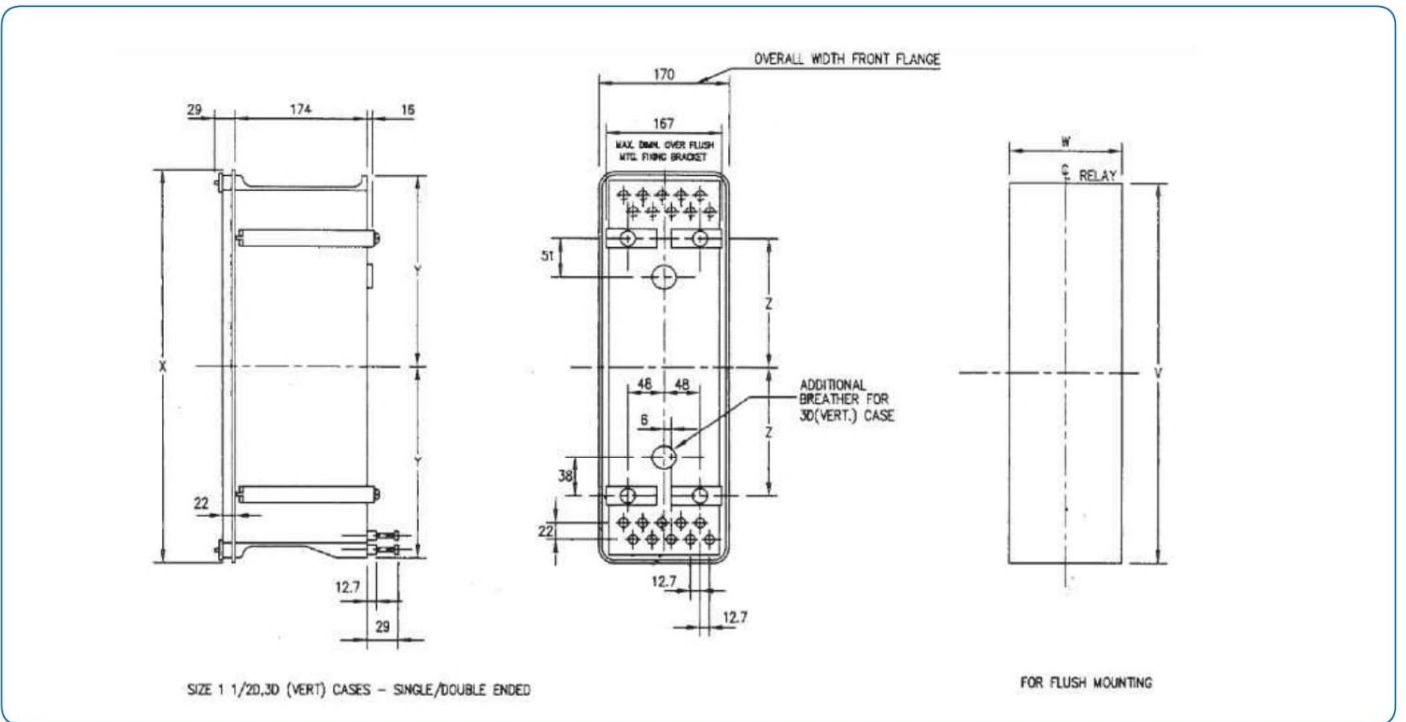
Case and panel cut-out dimensions for case 3D vert drawout (all dimensions in mm)
